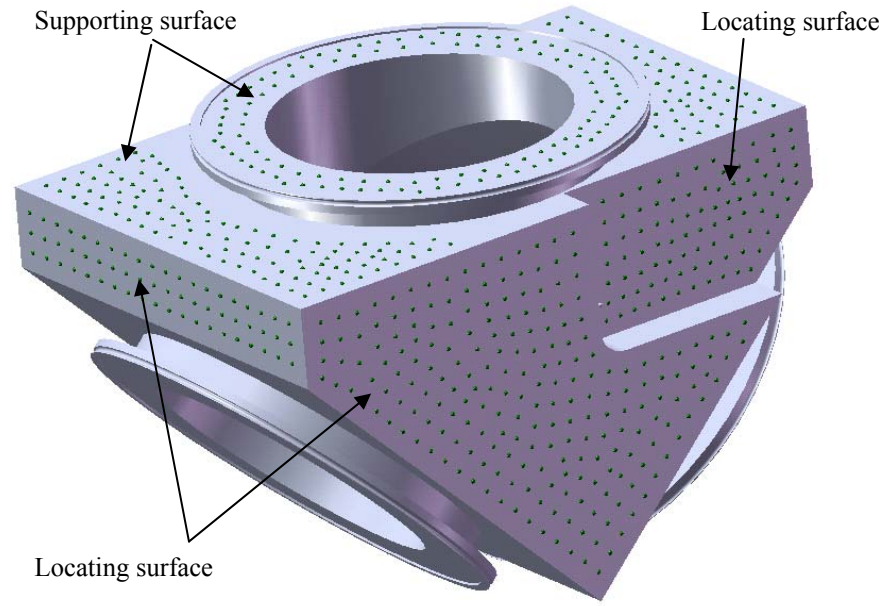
The candidate contact points for supporting and locating on the workpiece
